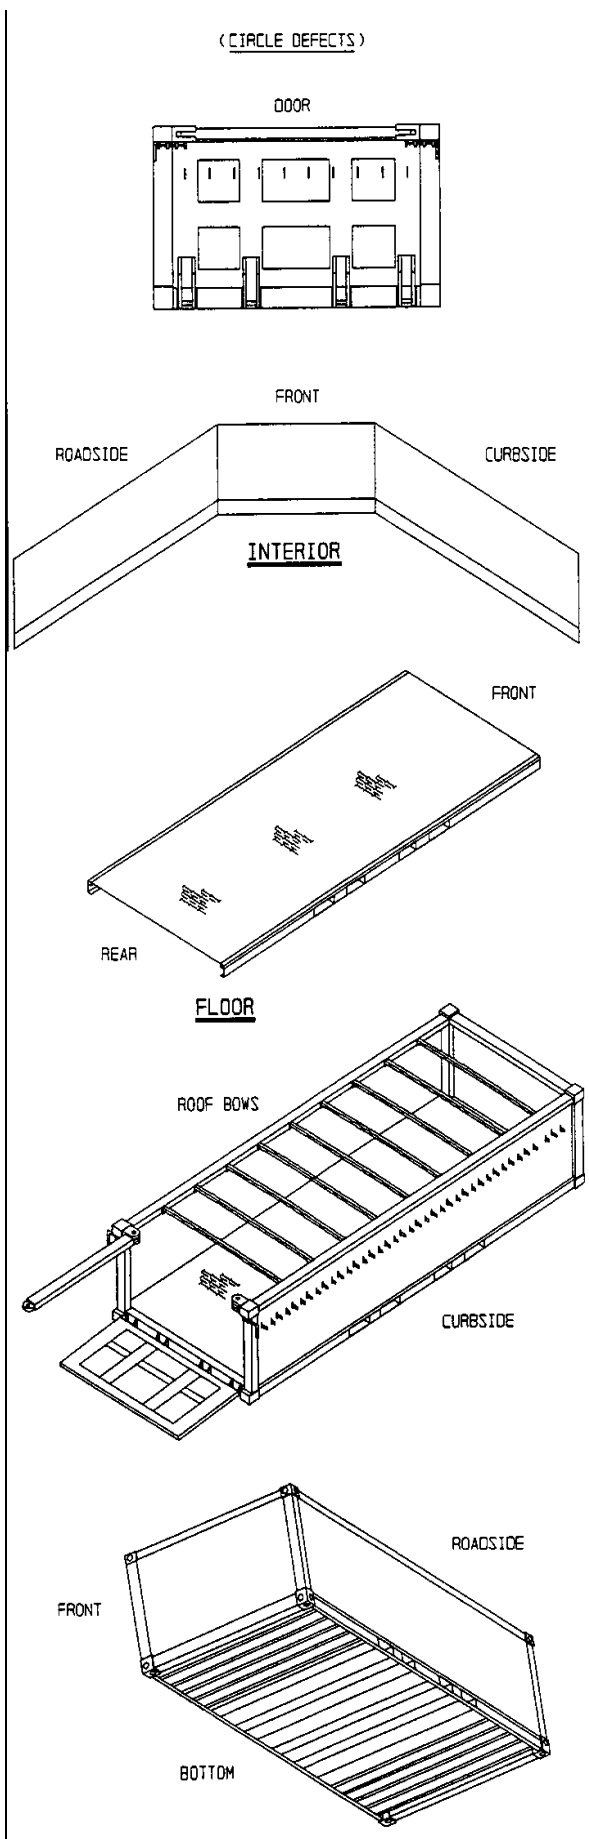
OPEN TOP CONTAINER INSPECTION CHECKLIST
